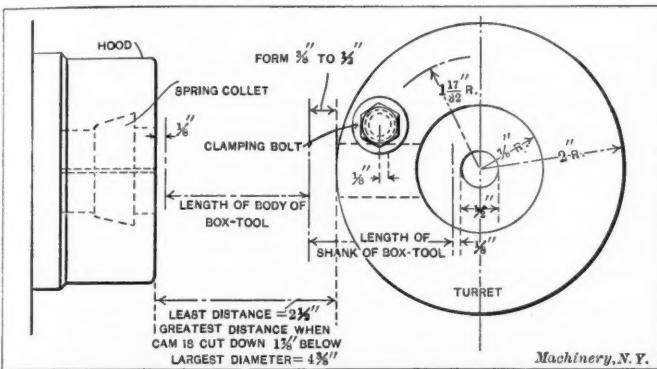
Method of Determining Length of Body and Shank of Box-tool
